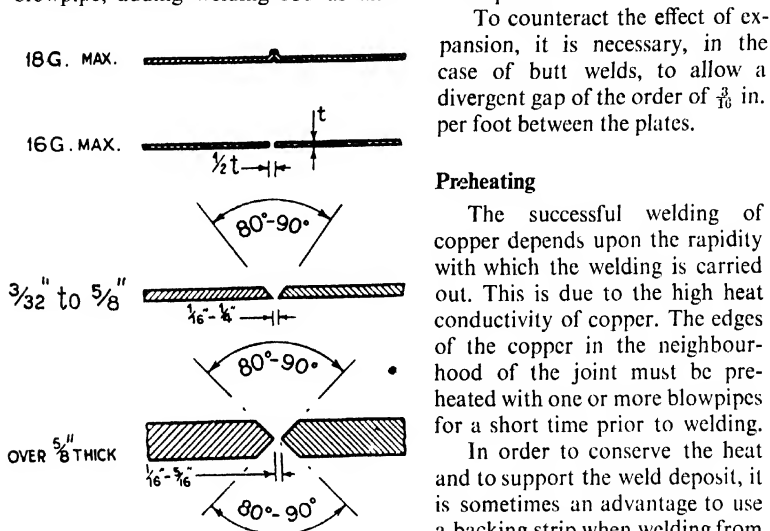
EDGE PREPARATION FOR COPPER DOWNHAND WELDING (*The British Oxygen Co., Ltd.*)
